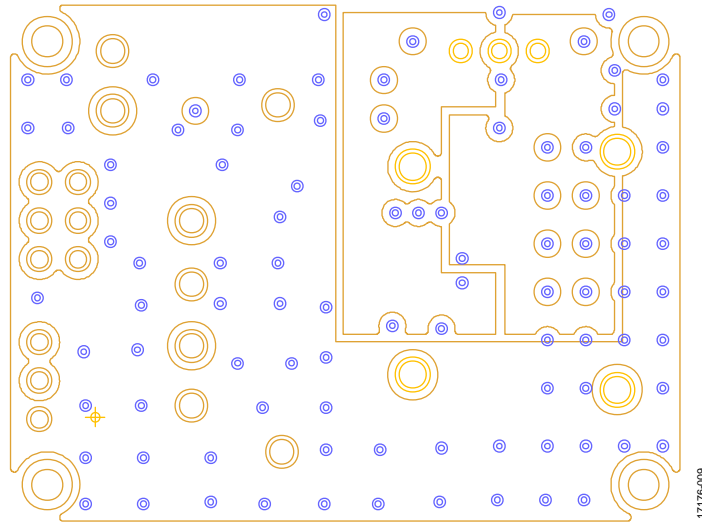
Evaluation Board Layout, Power Plane (Layer 3)
